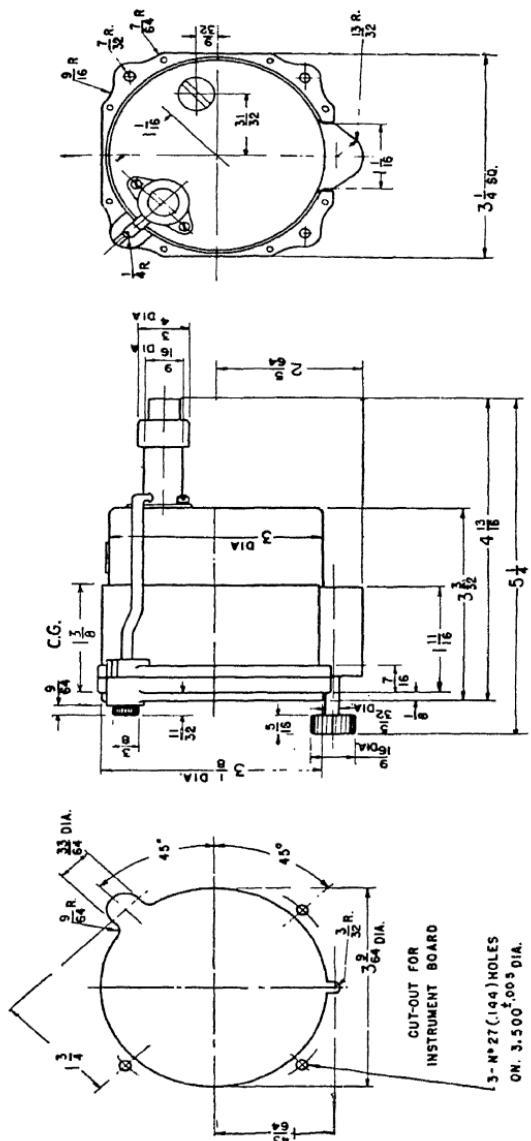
Installation Dimensions Pioneer Type 3401-1A
